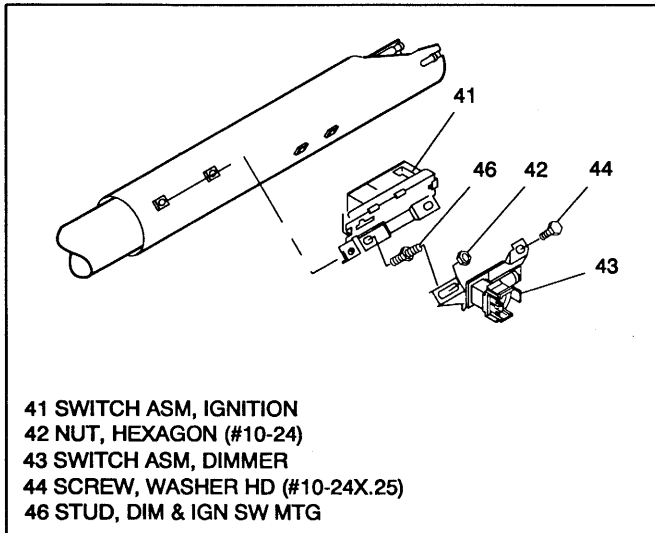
Removing Dimmer & Ignition Switch Assemblies
